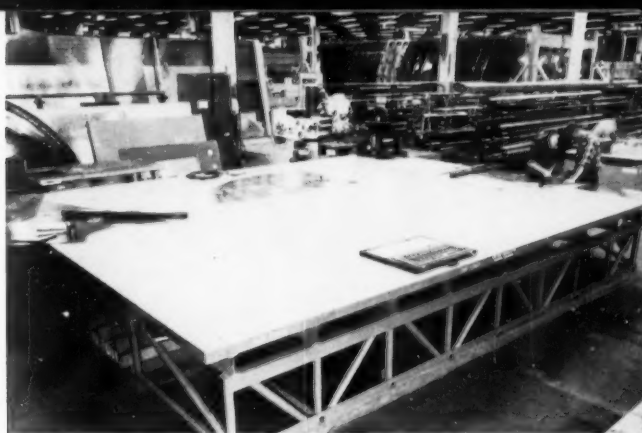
(upper right) Master tooling template table made from magnesium. The tooling plate required no machining and resulted in a saving over steel.
